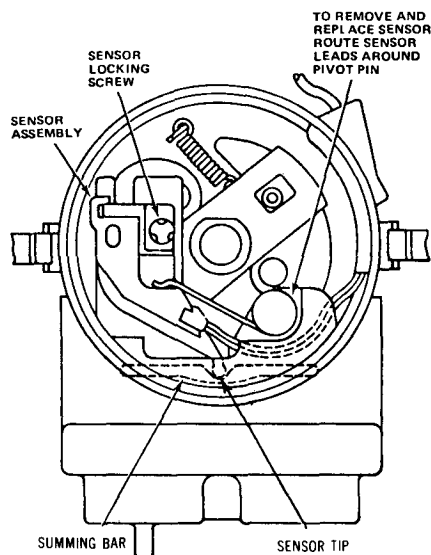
REMOVAL/INSTALLATION OF SENSOR ASSEMBLY
